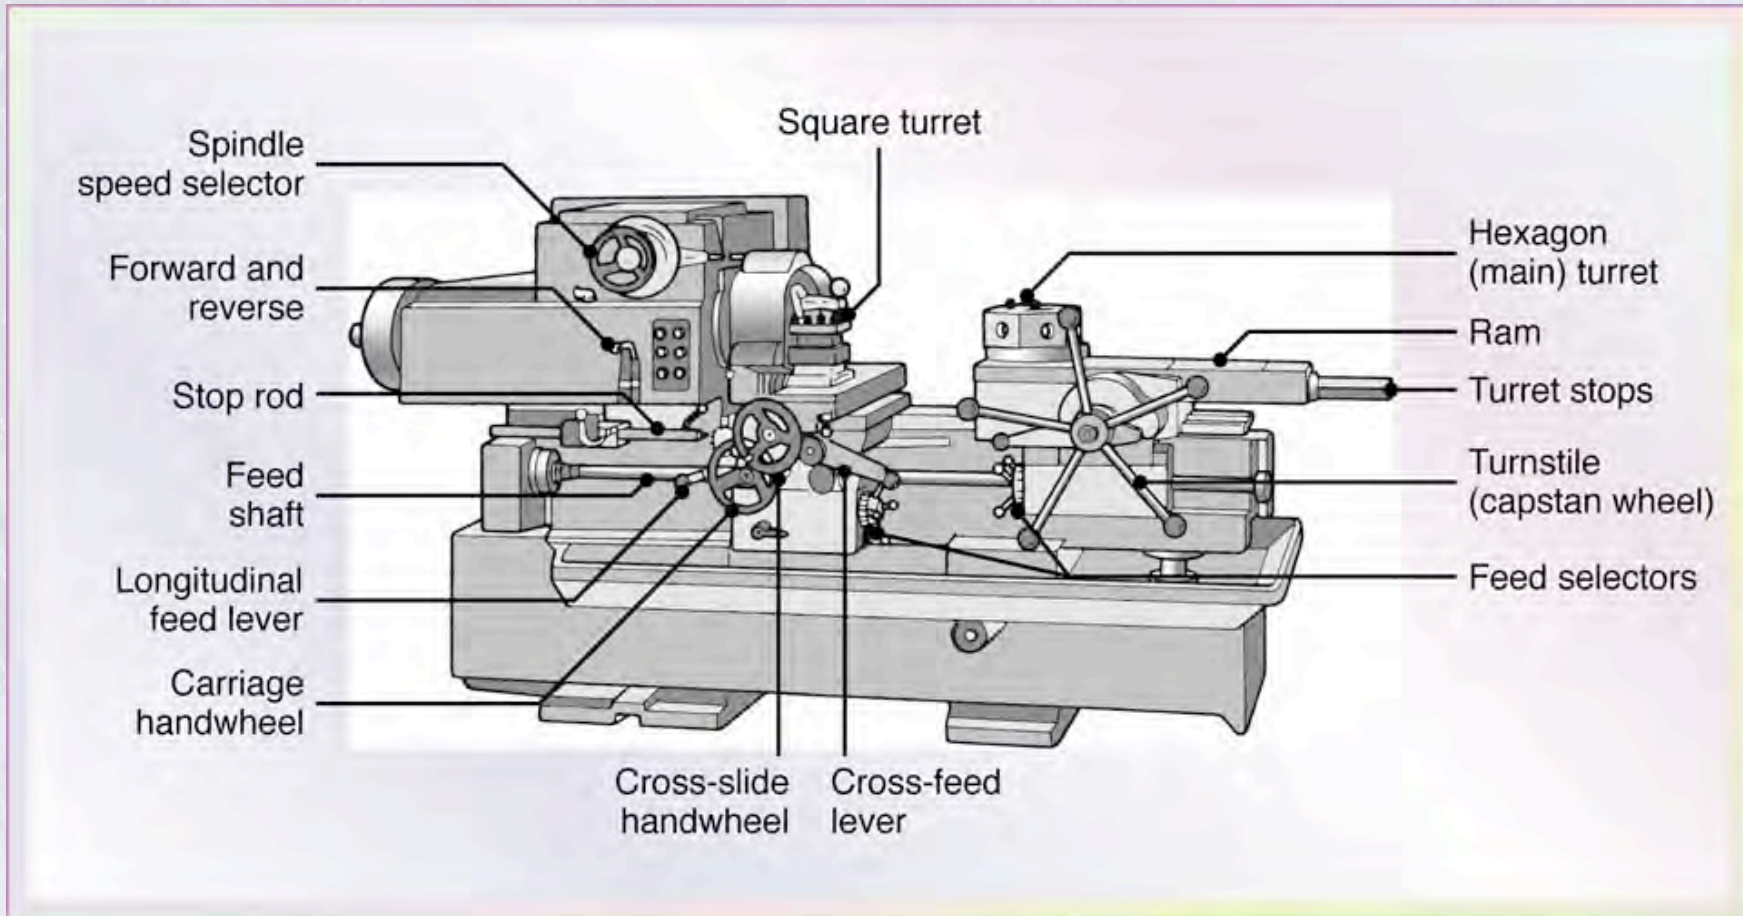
Schematic illustration of the components of a turret lathe. Note the two turrets: square and hexagonal (main).
